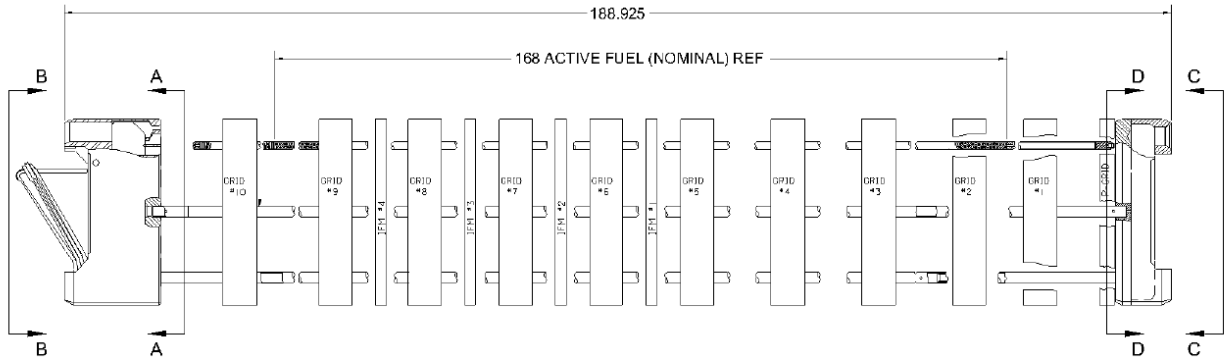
AP 1000 fuel assembly, dimensions in inches [17]
